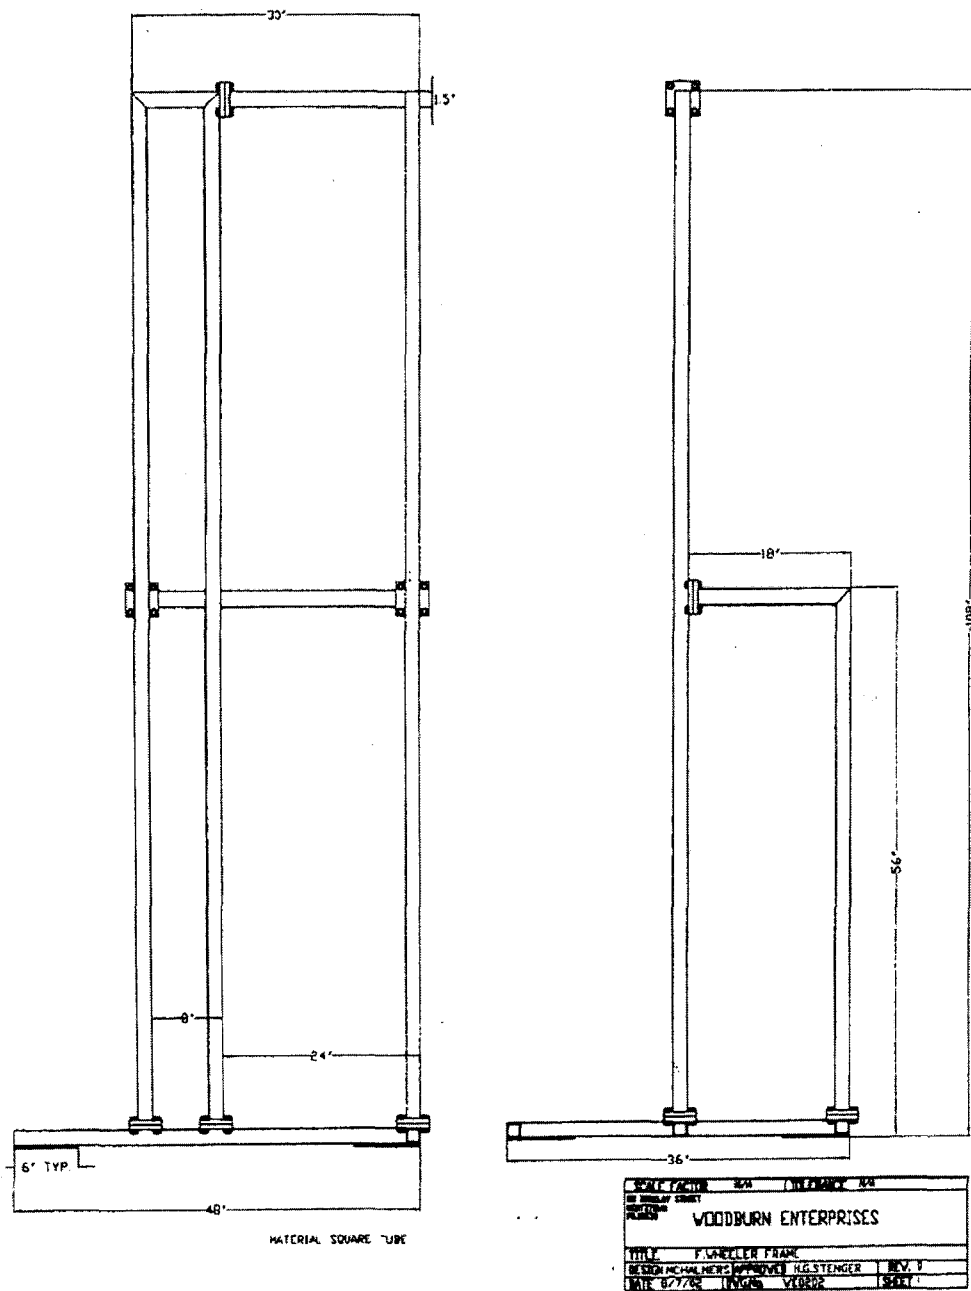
A: CAD drawing of front and side view of frame.
